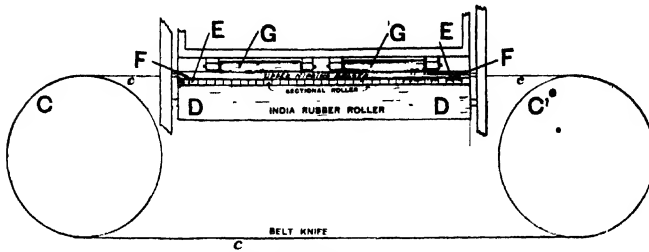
Band Knife Splitting Machine, (End View.)
